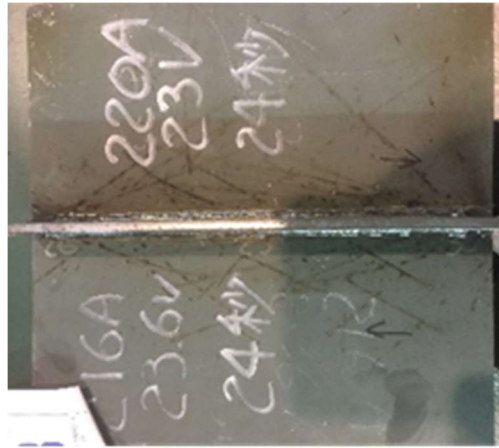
Photograph of top view of both-side fillet joint by arc welding
